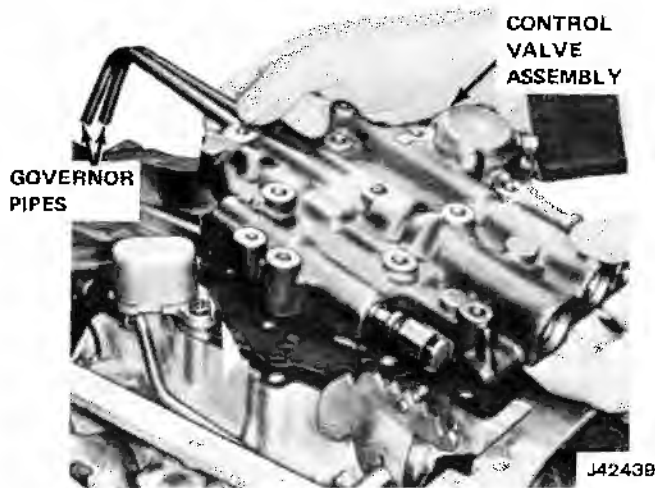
Removing Control Valve Assembly and Governor Pipes
